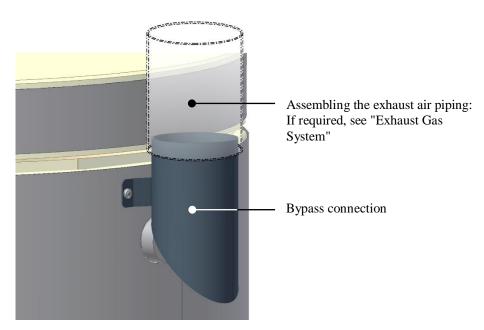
Assembling the exhaust gas piping on the bypass connection (similar to picture)
